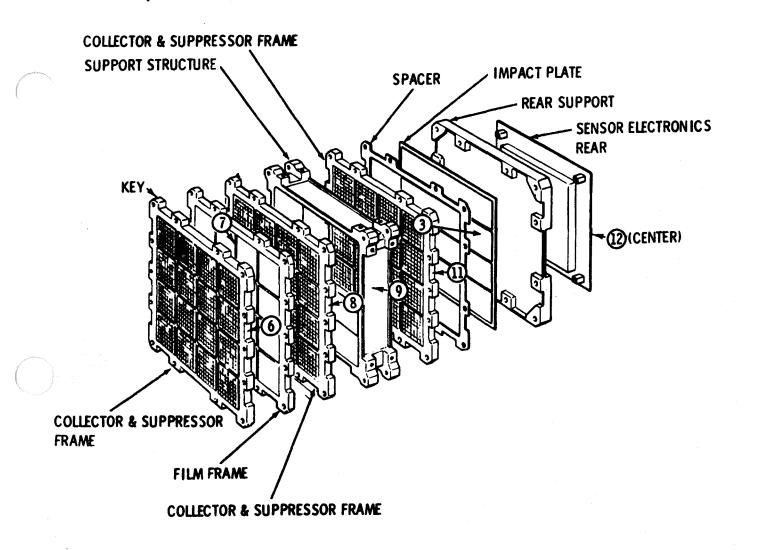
Exploded View of Dual Sensor (T/C Locations Up Sensor)
